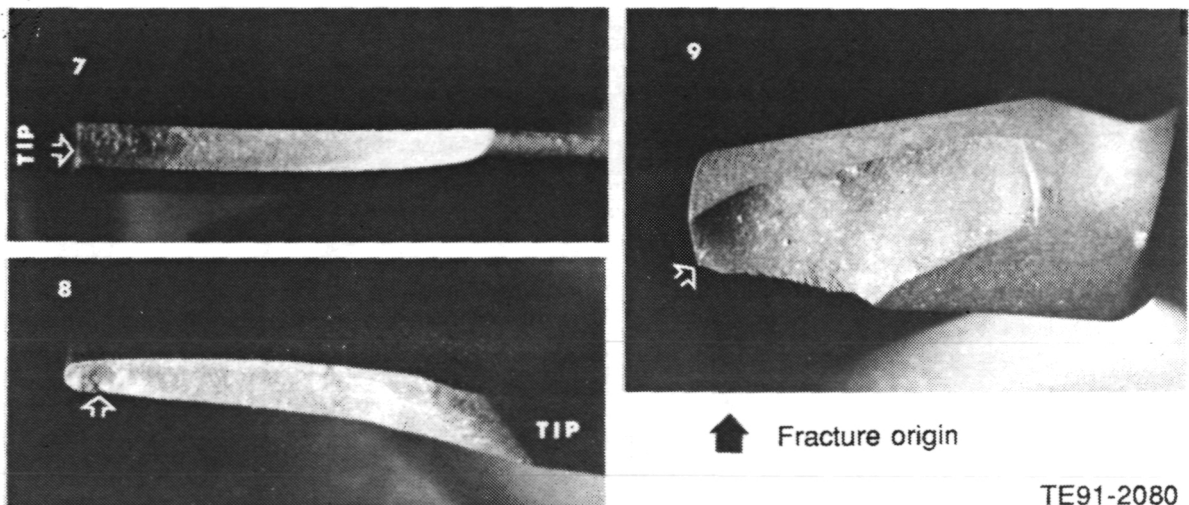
Fracture origins in Kyocera rotor S/N 5K25 airfoils.
